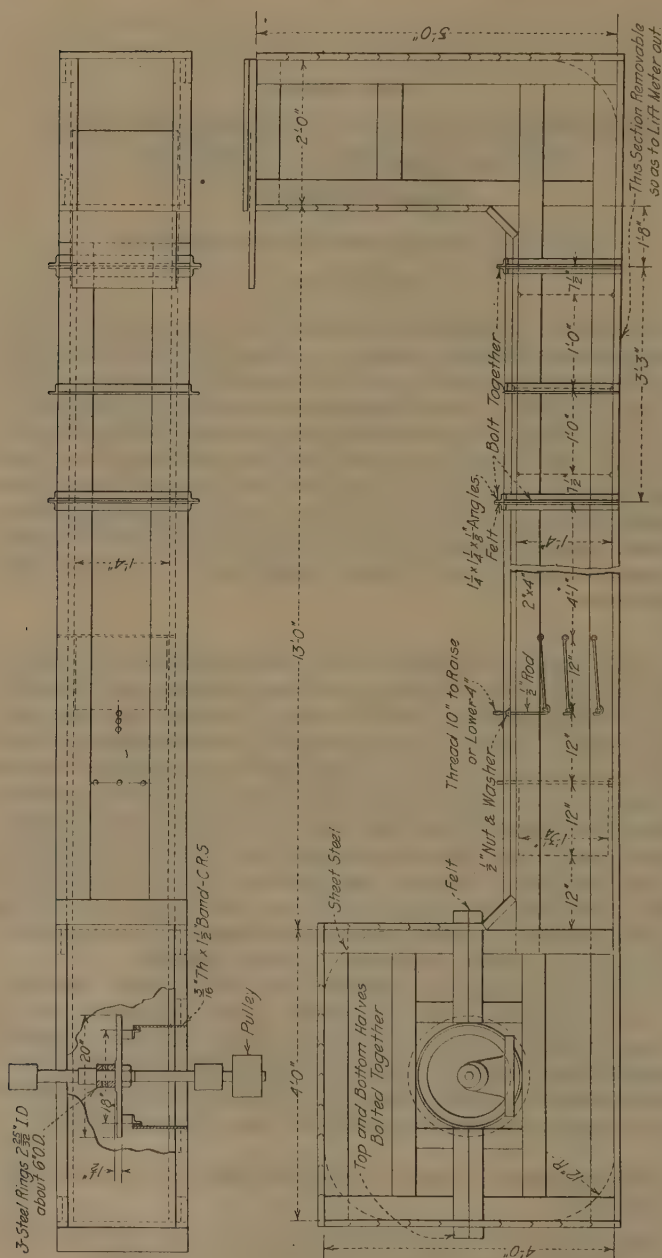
PLAN AND ELEVATION OF EQUIPMENT USED IN TESTING CENTRIFUGAL FANS FOR COOLING ELECTRICAL MACHINERY
